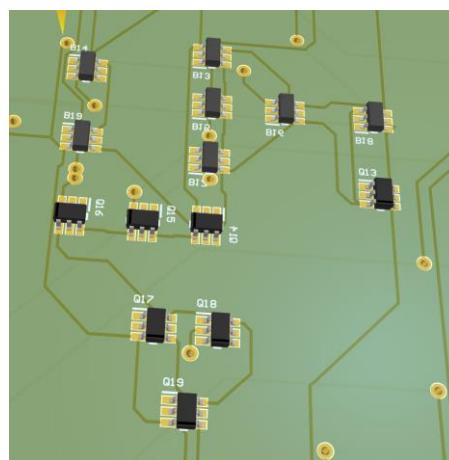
MOSFETS consisting of muller-C(c) on the PCB
